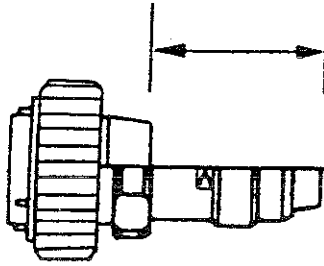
CABLE OUTER JACKET STRIPPING DIMENSION
